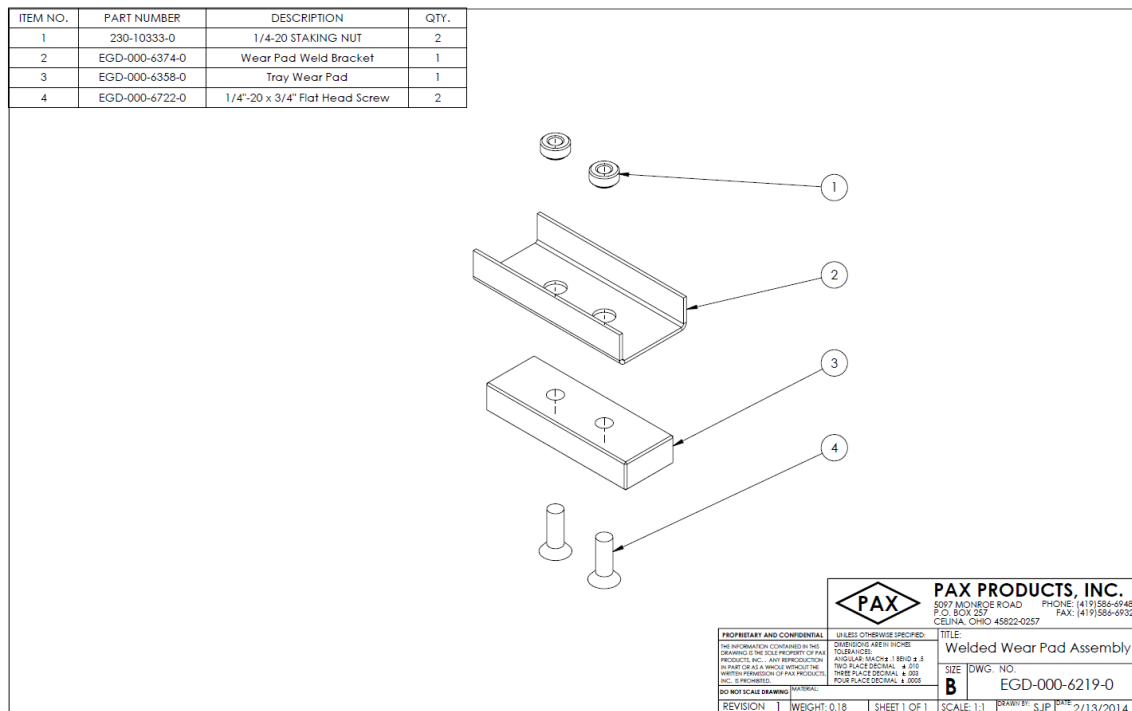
EGD-000-6219-0 WELDED WEAR PAD ASSEMBLY
